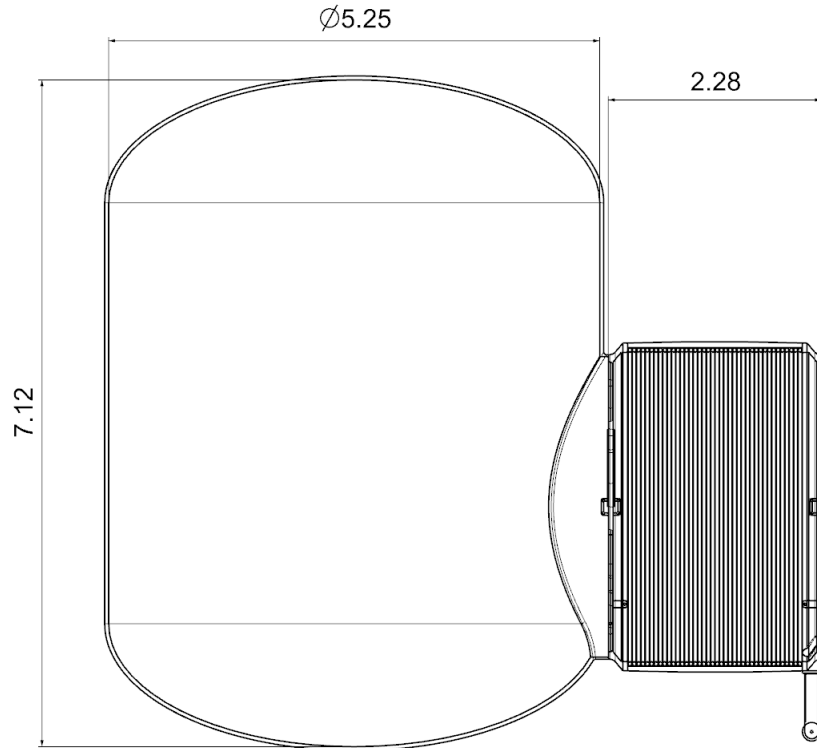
Surface 80 m^3 Dimensioned External Drawing, units in meters
